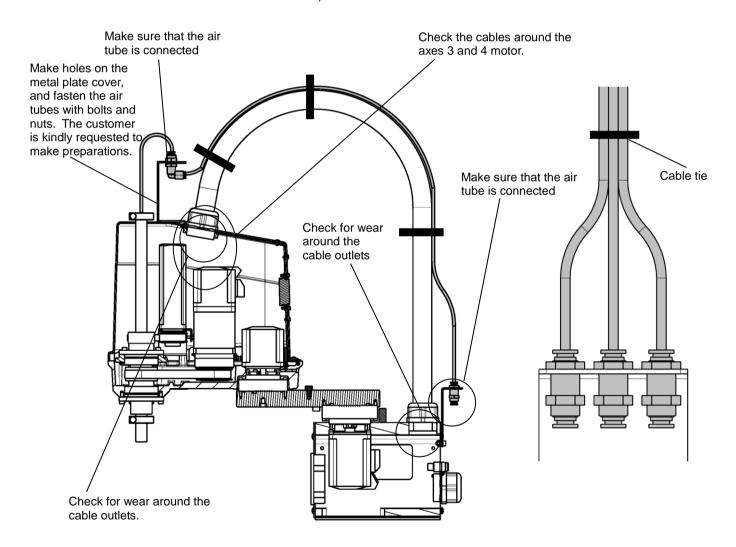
Cable inspection locations (KHL-300, KHL-400)
